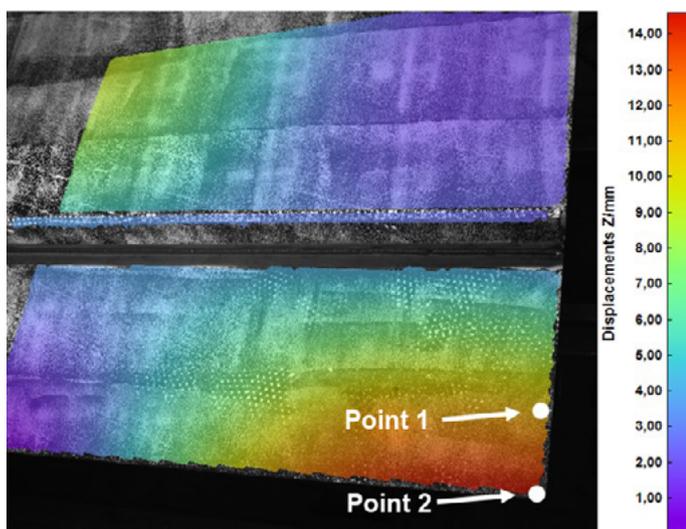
Fragment the element subjected to welding with the superimposed field of displacement in the direction perpendicular to the surface of the flat section after the completion of the welding process, point 1 – maximum displacement (14.1 mm)
